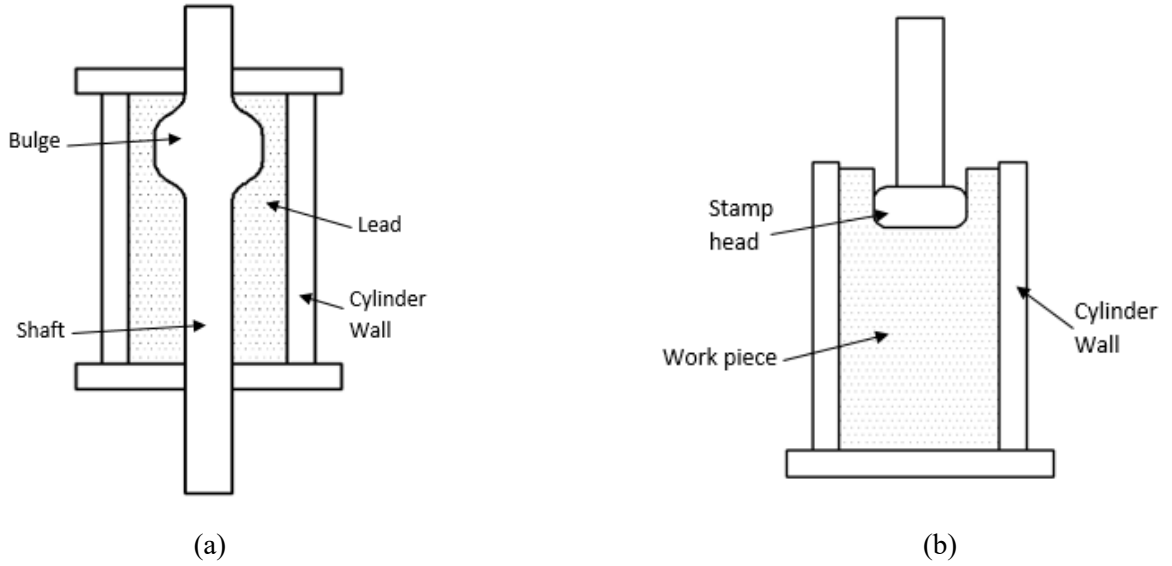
(a) HF2V parts (b) Indirect extrusion parts
